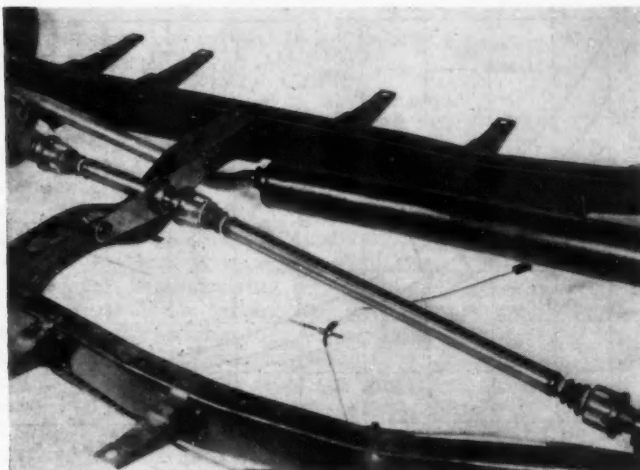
If a propeller shaft gets too long, it is advisable to use a two-piece installation with a center bearing, as shown
